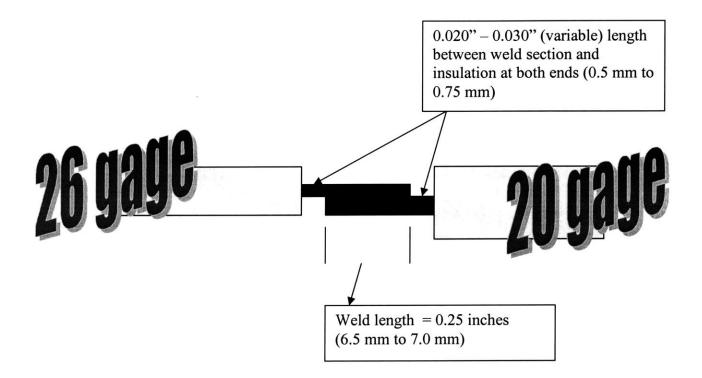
Weld section geometry between a 20 gage wire (with 19 strands of 32 gage conductors) and a 26 gage wire (with 19 strands of 38 gage conductors). The outer diameter of 20 gage wire is 0.054-0.062" and that of 26 gage wire is 0.035"-0.043". The 0.020" to 0.0.030" space shown between the weld and the insulation may be changed to obtain optimum weld section characteristics.
